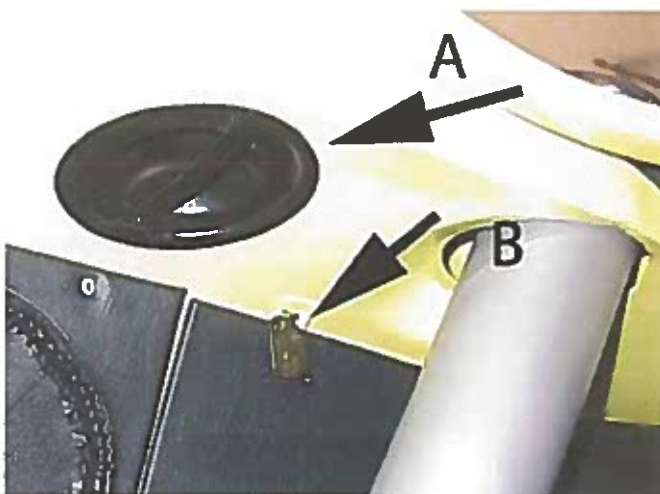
This view, looking upwards in a BNG/7 boot, shows the metal cover plate (A) that hides access to the right side hinge mounting stud/nut. The fuel filler pipe is at the right, and arrow (B) points to one of the metal tabs, used to hold the boot trim panels in place, that has been hand painted to match the black vinyl.
